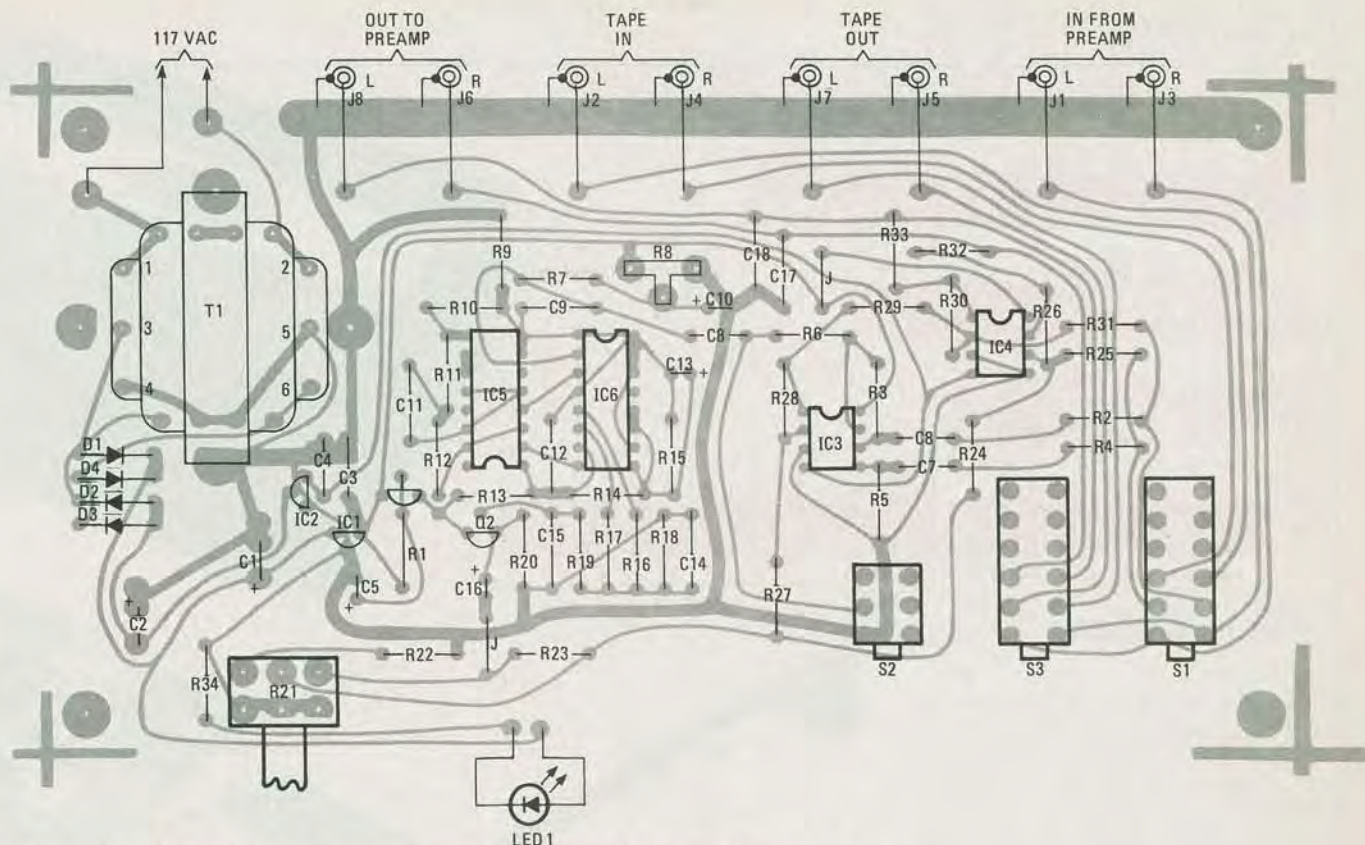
PROVISION IS MADE for mounting right-angle input and output jacks directly on board.
